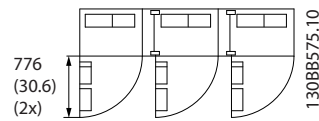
Space in front of IP21/IP54 enclosure type, frame size F11
